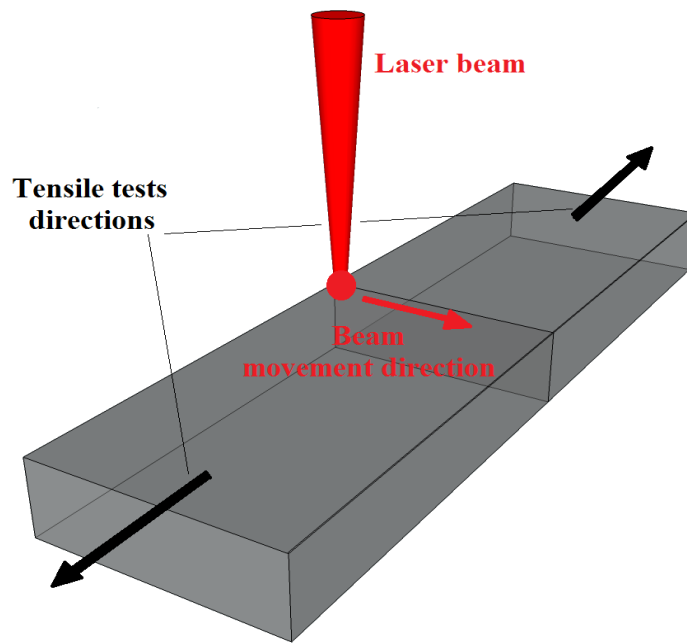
Schematic of welding technique used for laser welded polycarbonate sample tensile testing
